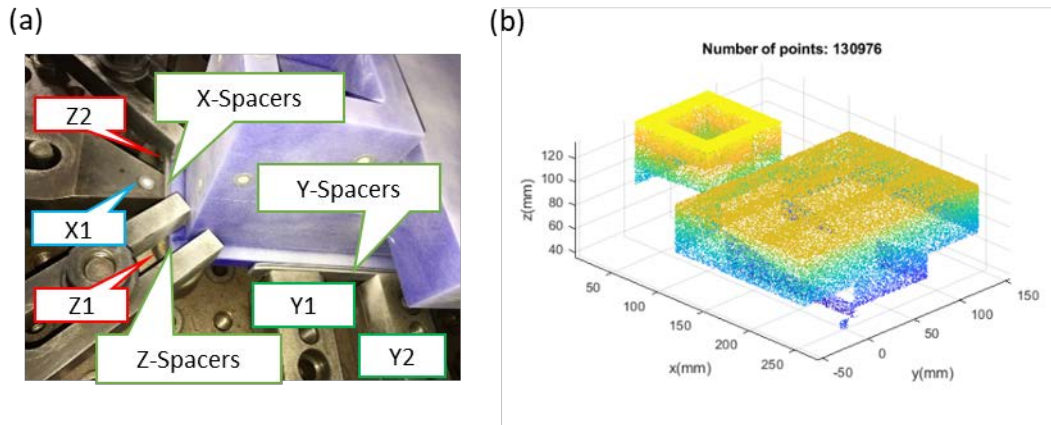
(a) Locators and spacers setup; (b) Collected point cloud of the casting
